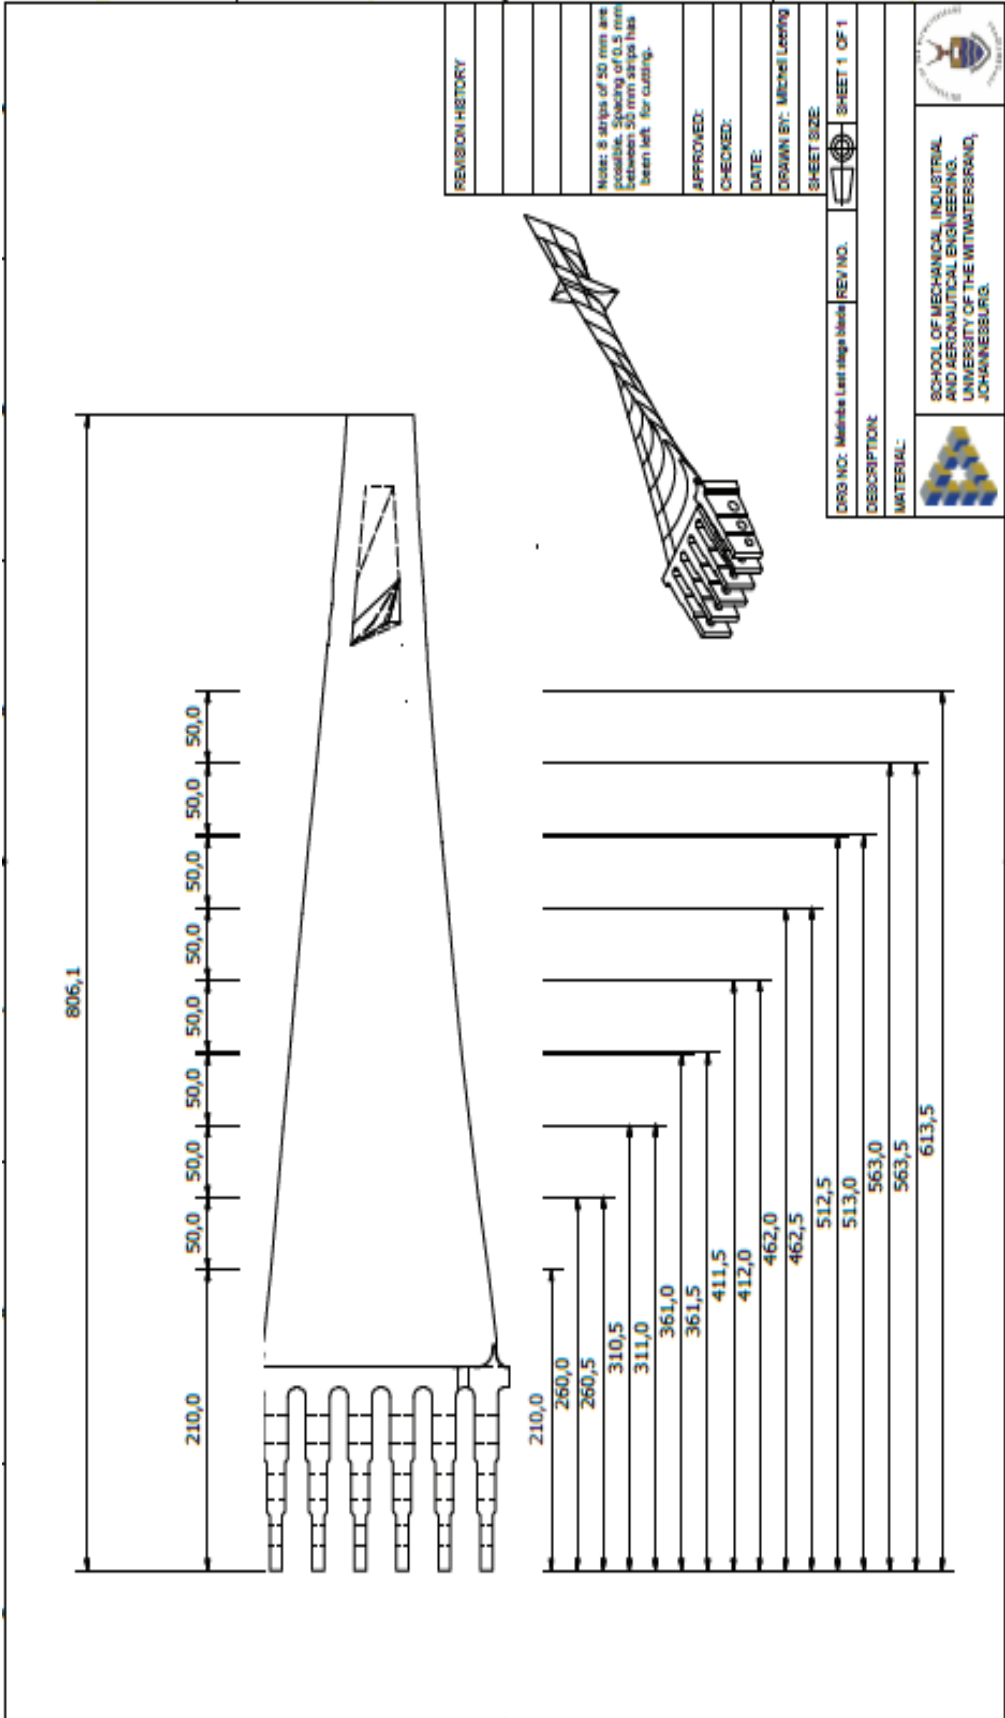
A drawing of the LP turbine blade illustrating how it was mapped before machining
